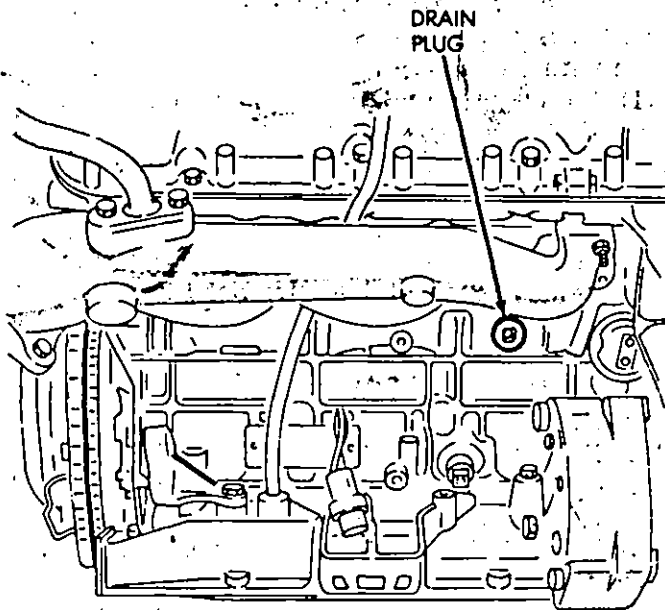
3.0L Engine Cylinder Block Drain Plug—Left Side
